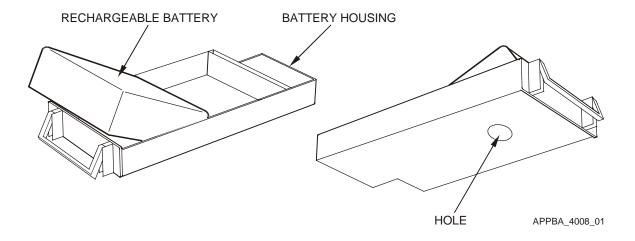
Remove Rechargeable Battery from Battery Housing Assembly
